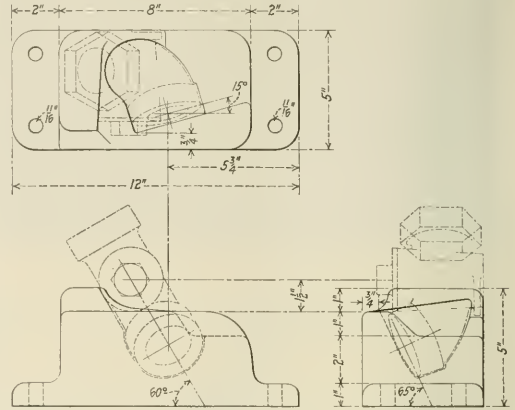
Block for Holding Angle Cock When Removing and Applying Handle
